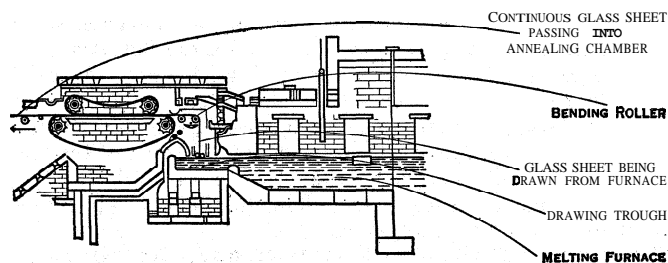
PRINCIPLE OF THE COLBURN (OR LIBBEY-OWENS) SHEET-GLASS DRAWING PROCESS
